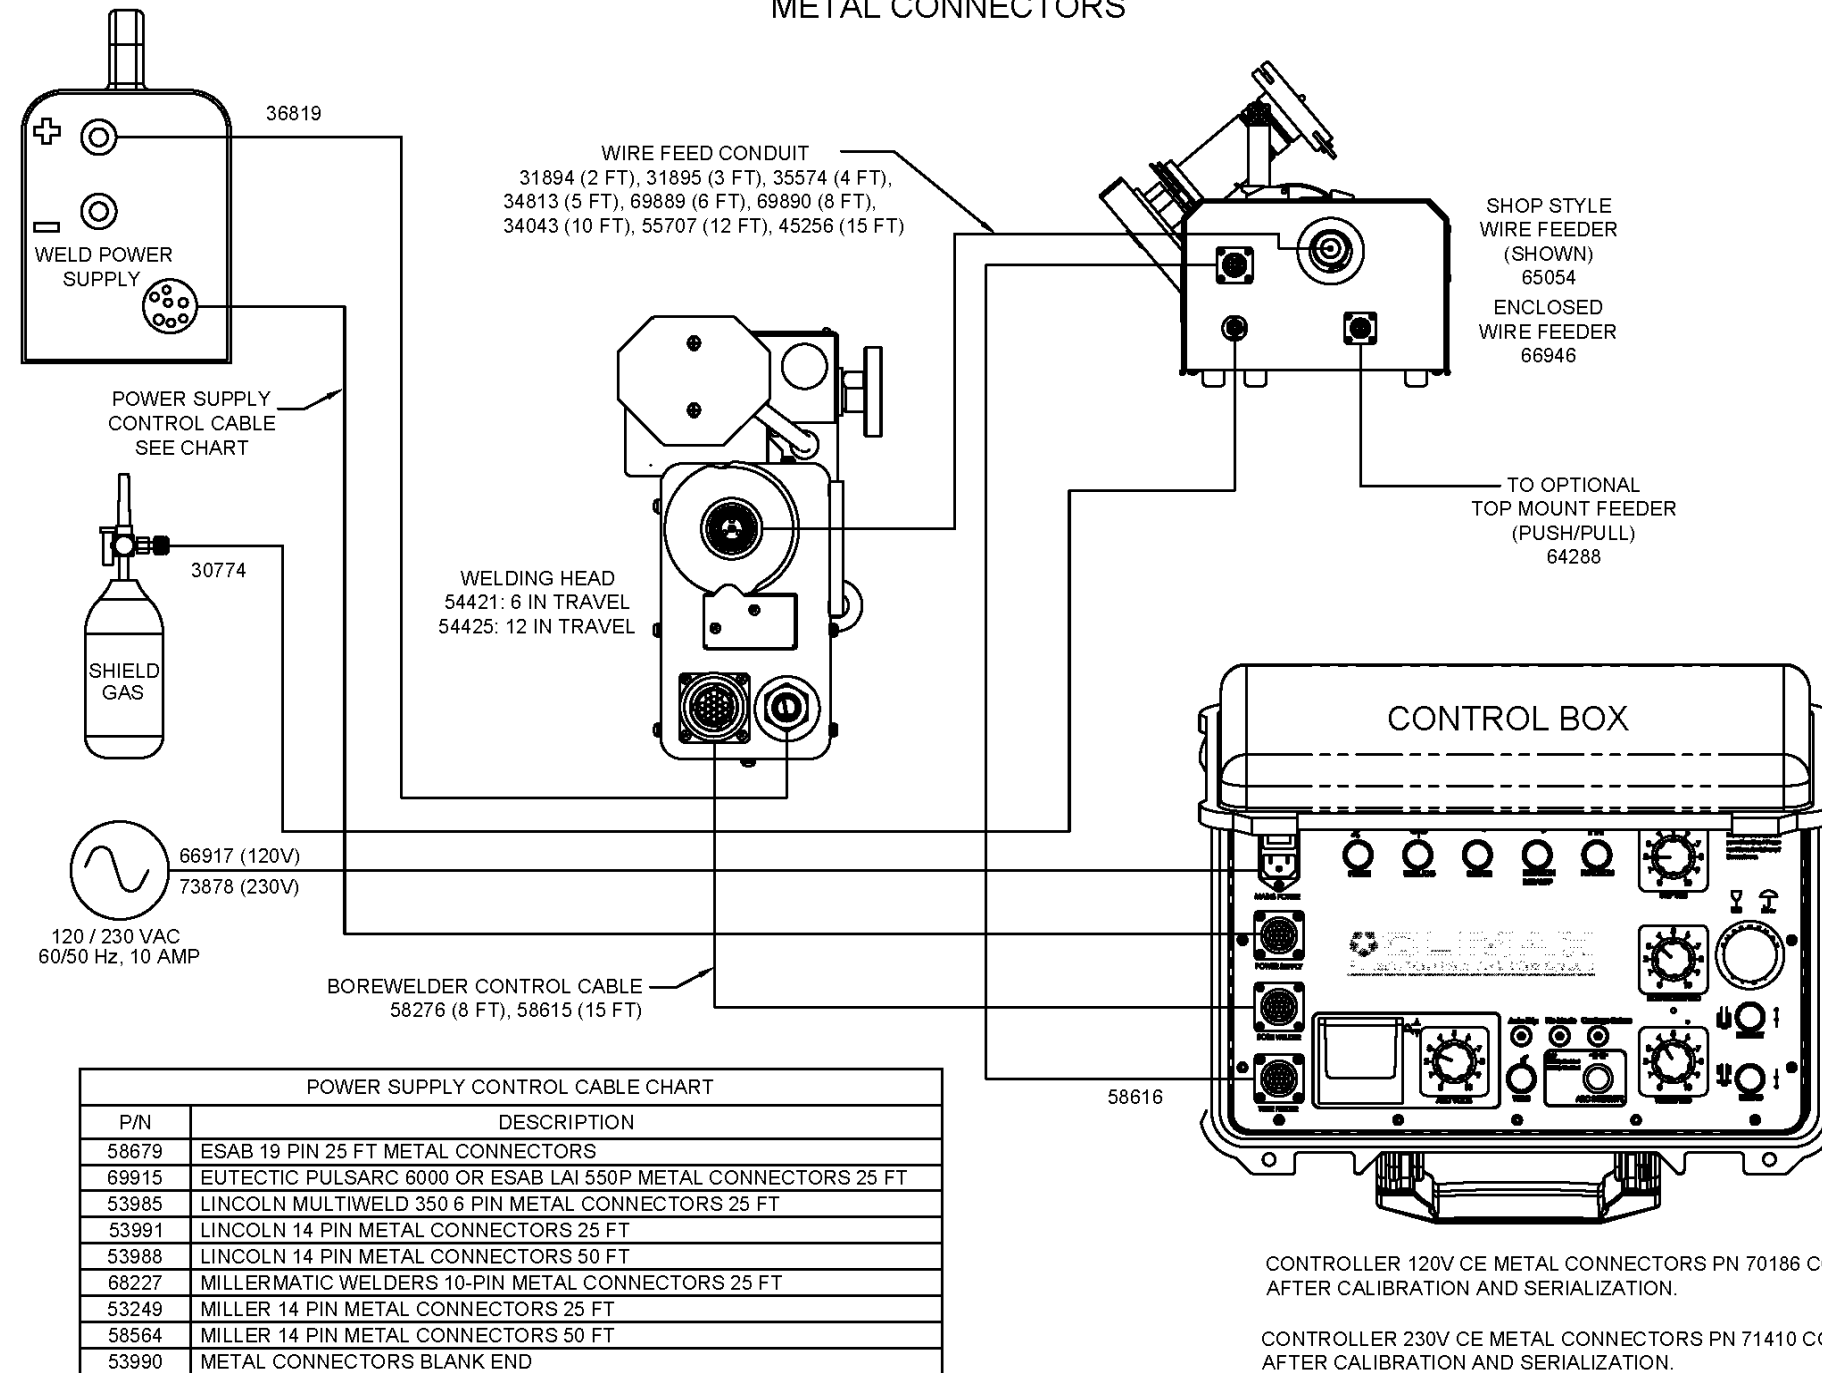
Schematic power supply interface cable 53991 metal connector (P/N 87421)
